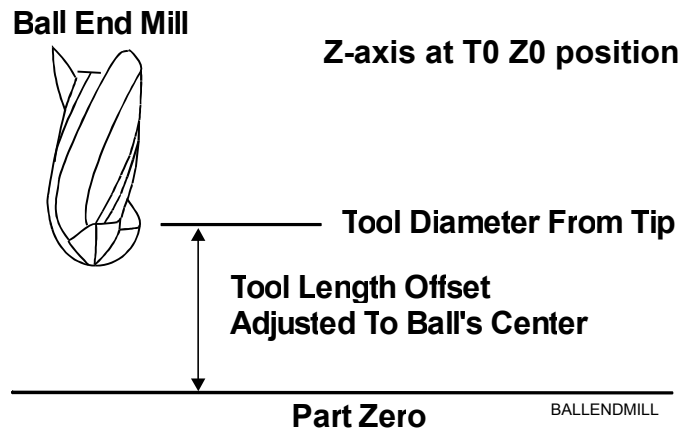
, Setting Tool-Length Offset for Ball End Mill
